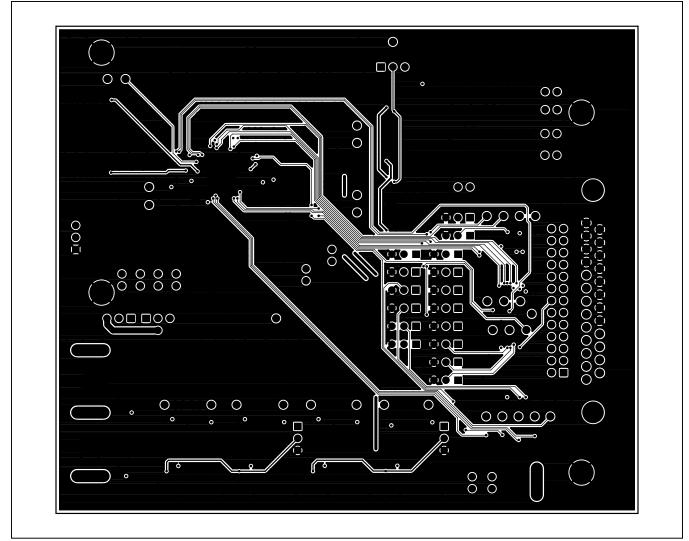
MAX2839 EV Kit PCB Layout—Inner Layer 3, Routes
